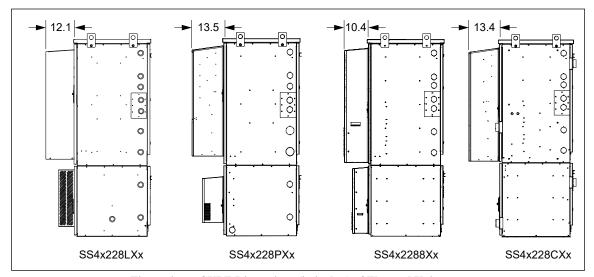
CUBE Dimensions (in inches) of Thermal Units
